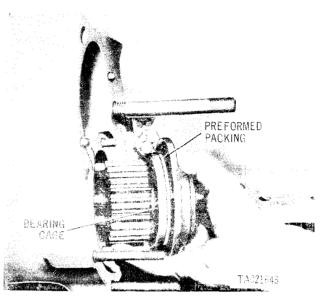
Removing or installing starter gearshaft bearing cage.
